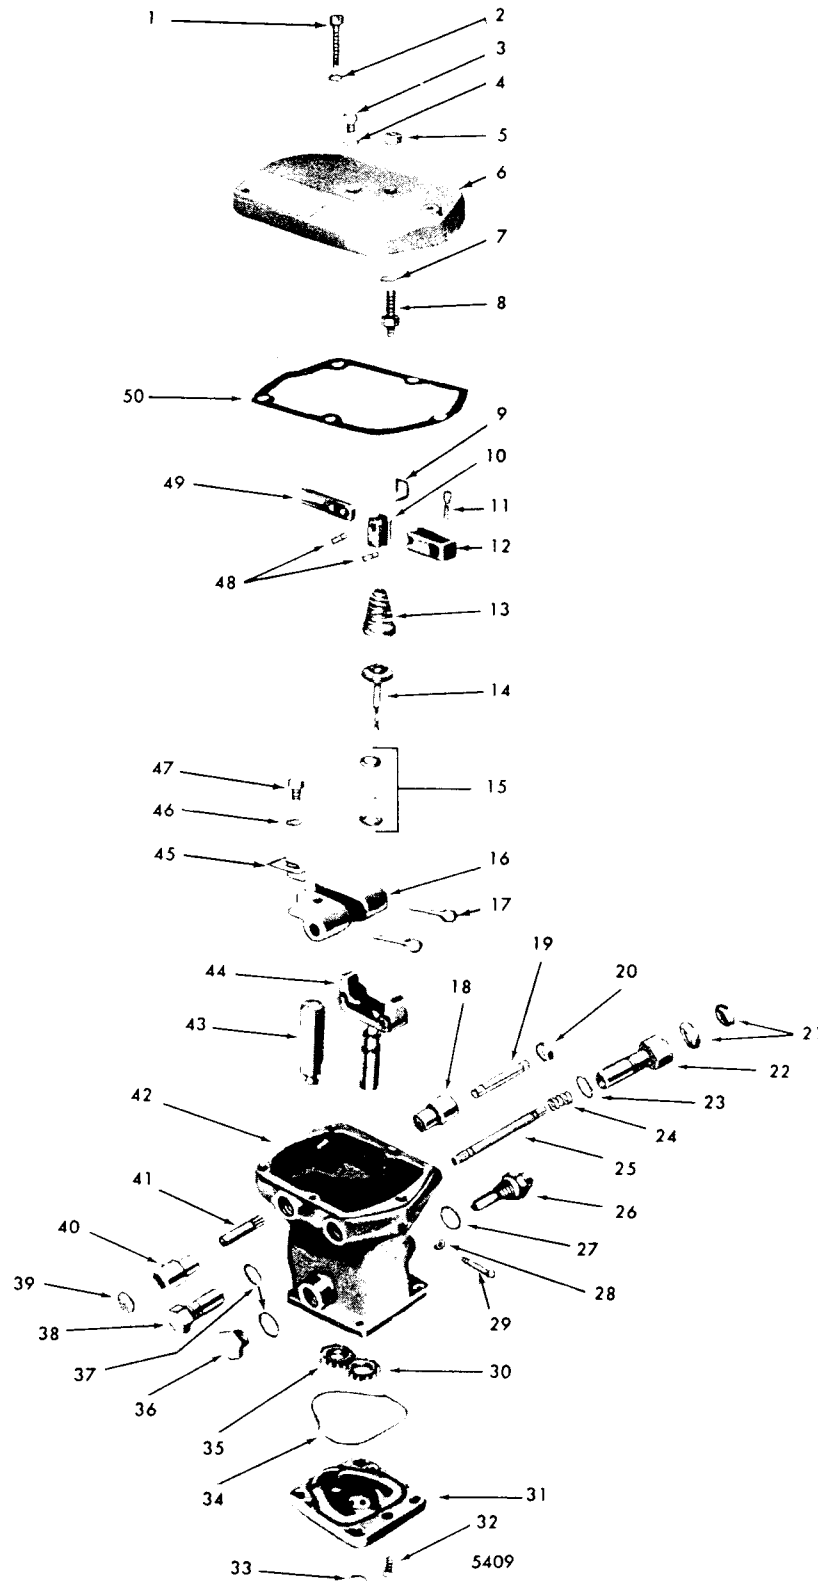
Hydraulic Governor Details and Relative Location of Parts (Former)
